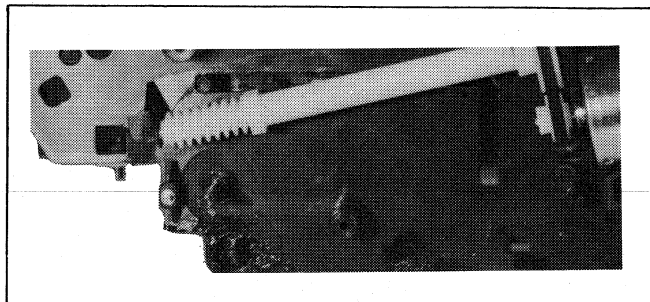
Adjustment of Cassette Up Gears-(1)
